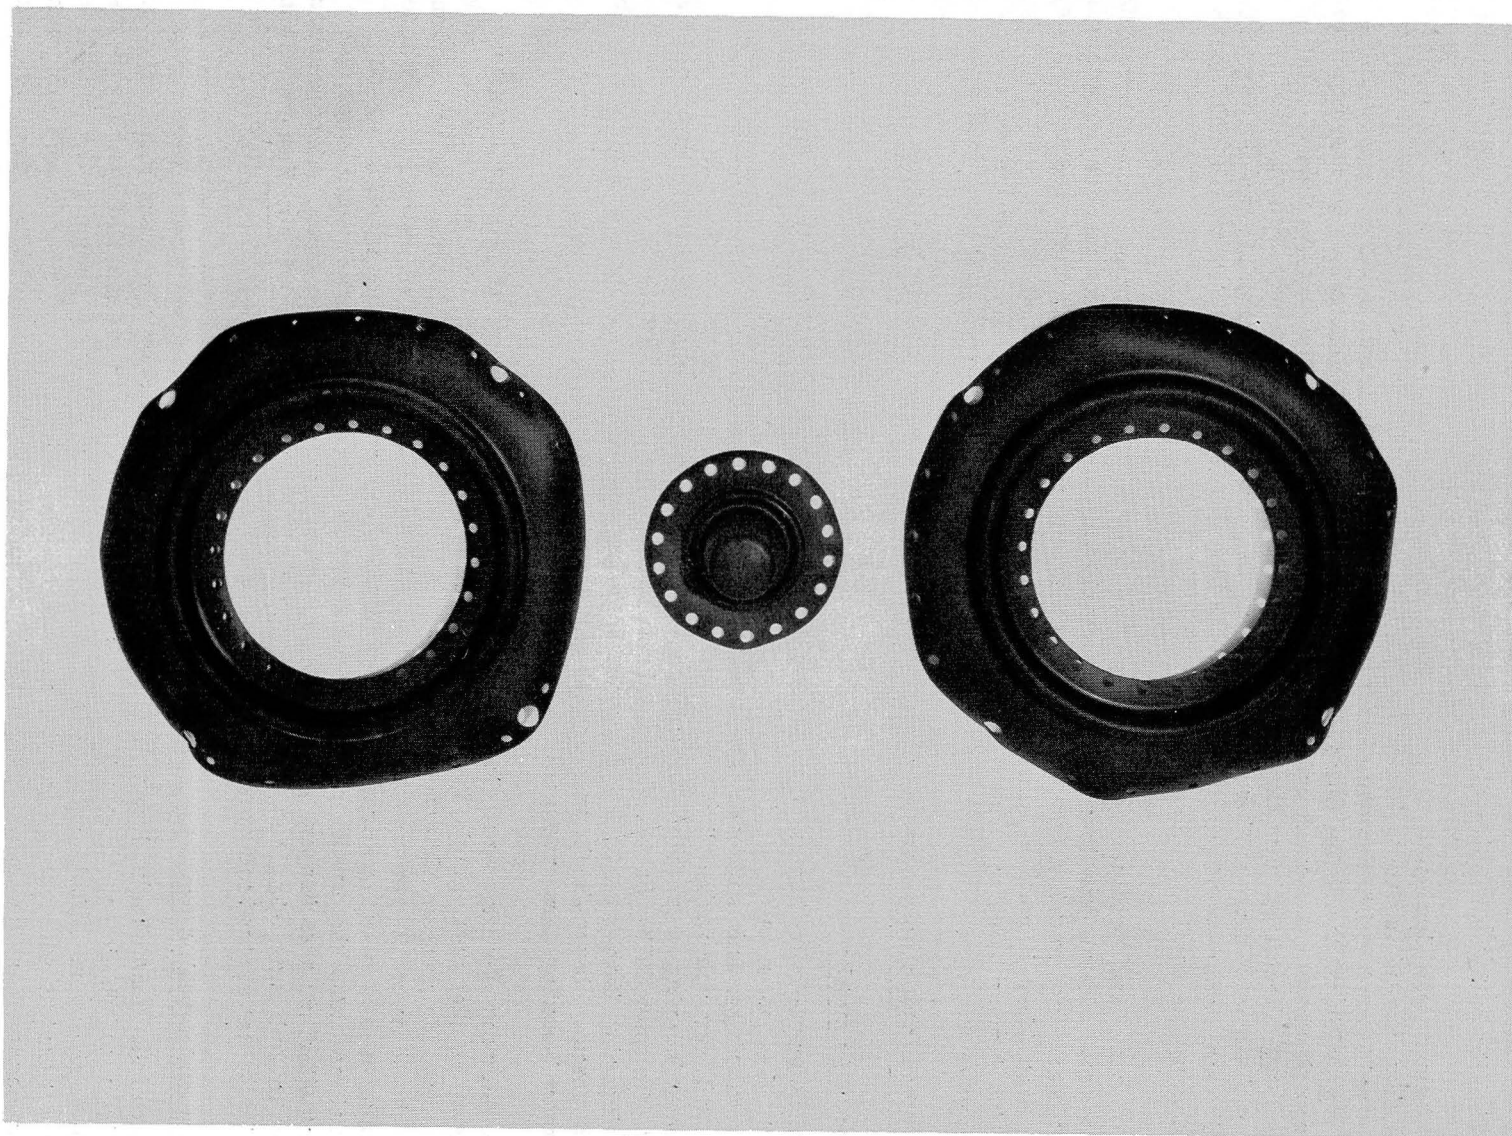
Bellofram Seals and Bladder for Test Shaft Damper
